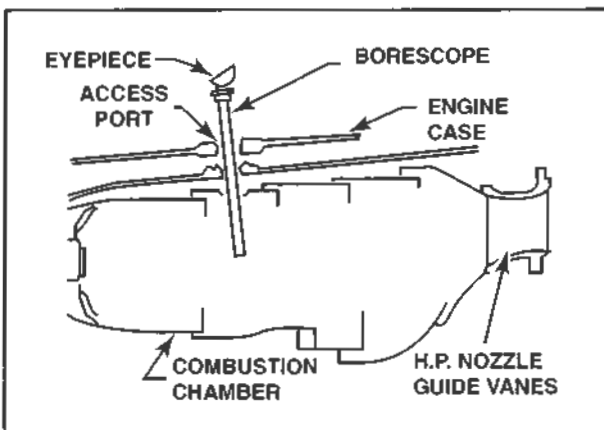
On some engines, the high pressure nozzle guide vanes are inspected with a borescope that is inserted into one of the engine's combustors.
